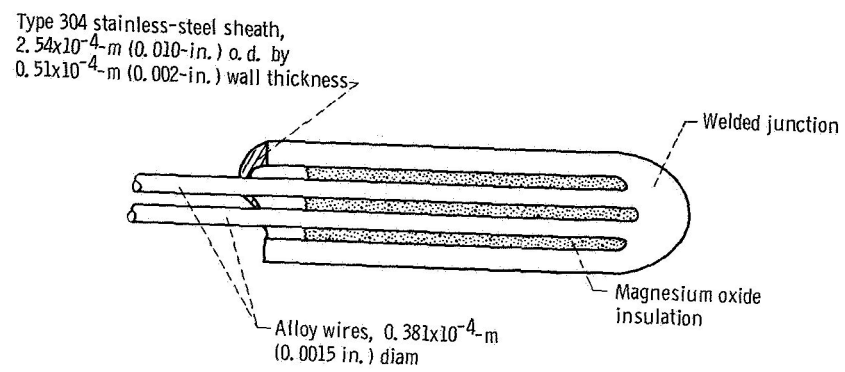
Details of heat-flux-meter Chromel-Alumel thermocouple assembly.
